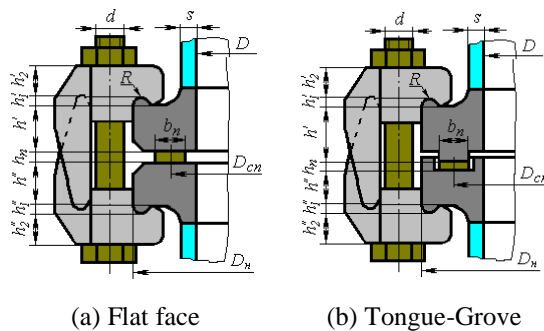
Flat welded flanges according to GOST 28759.2-90
